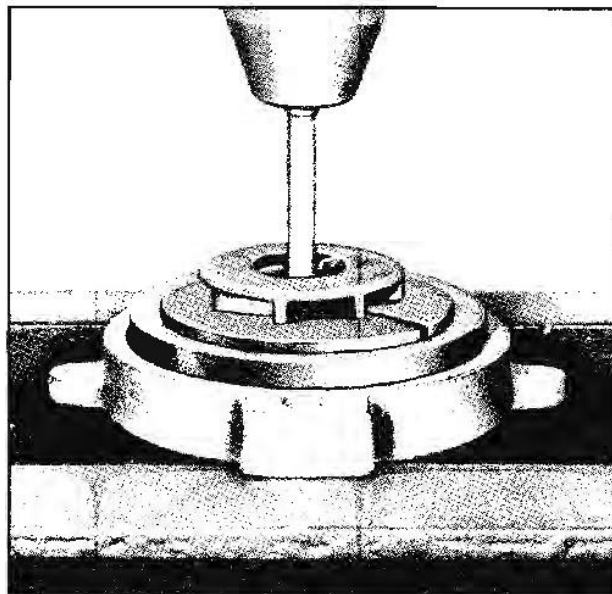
A-21 Pressing Shaft and Bearing Out of Impeller
